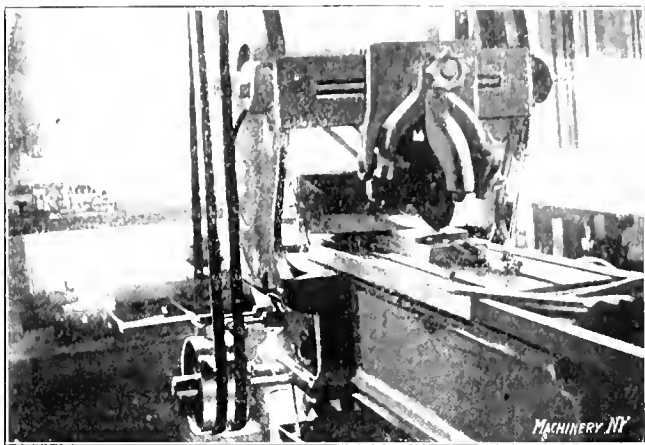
Surface Grinder with Wheel Guard and Dust Funnel
